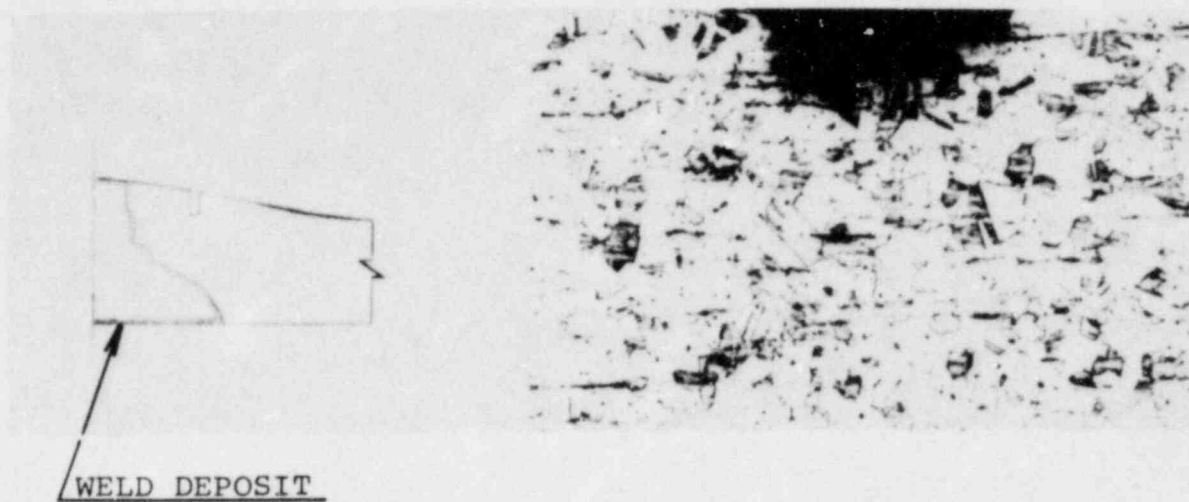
CRACKING OBSERVATION AT NOTCH TIP (R-53)
